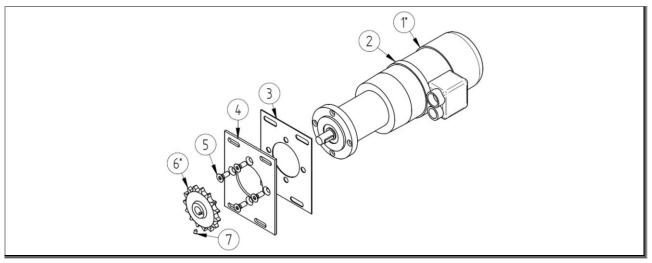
Parts list: Internal drive unit - motor unit - position of drive unit 14 - T.900.0004.00/T.900.0005.00
